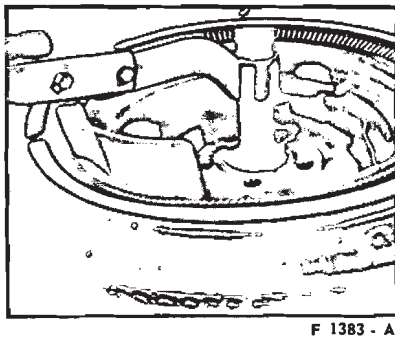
Breaking Top Bead of Tire From Wheel Rim
